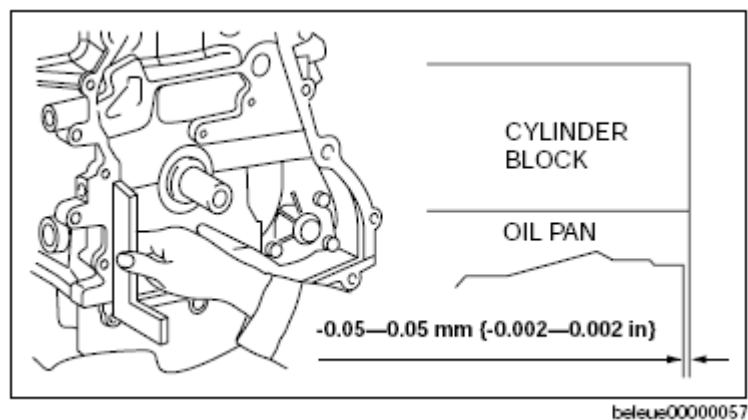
Assembling Oil Pan And Cylinder Block Junction Side On Engine Front Cover Side Using Square Ruler
